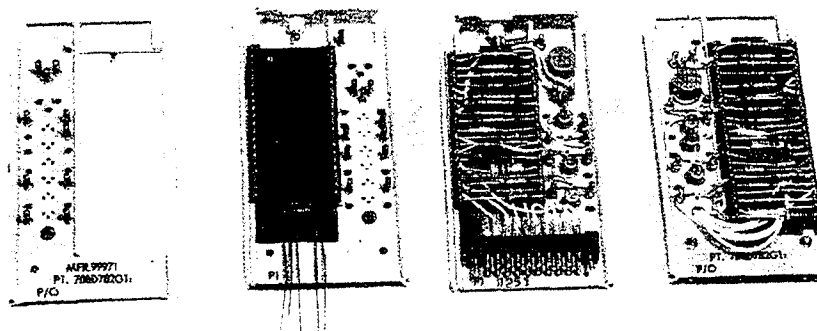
Welded wire matrix version now used in production equipment.
